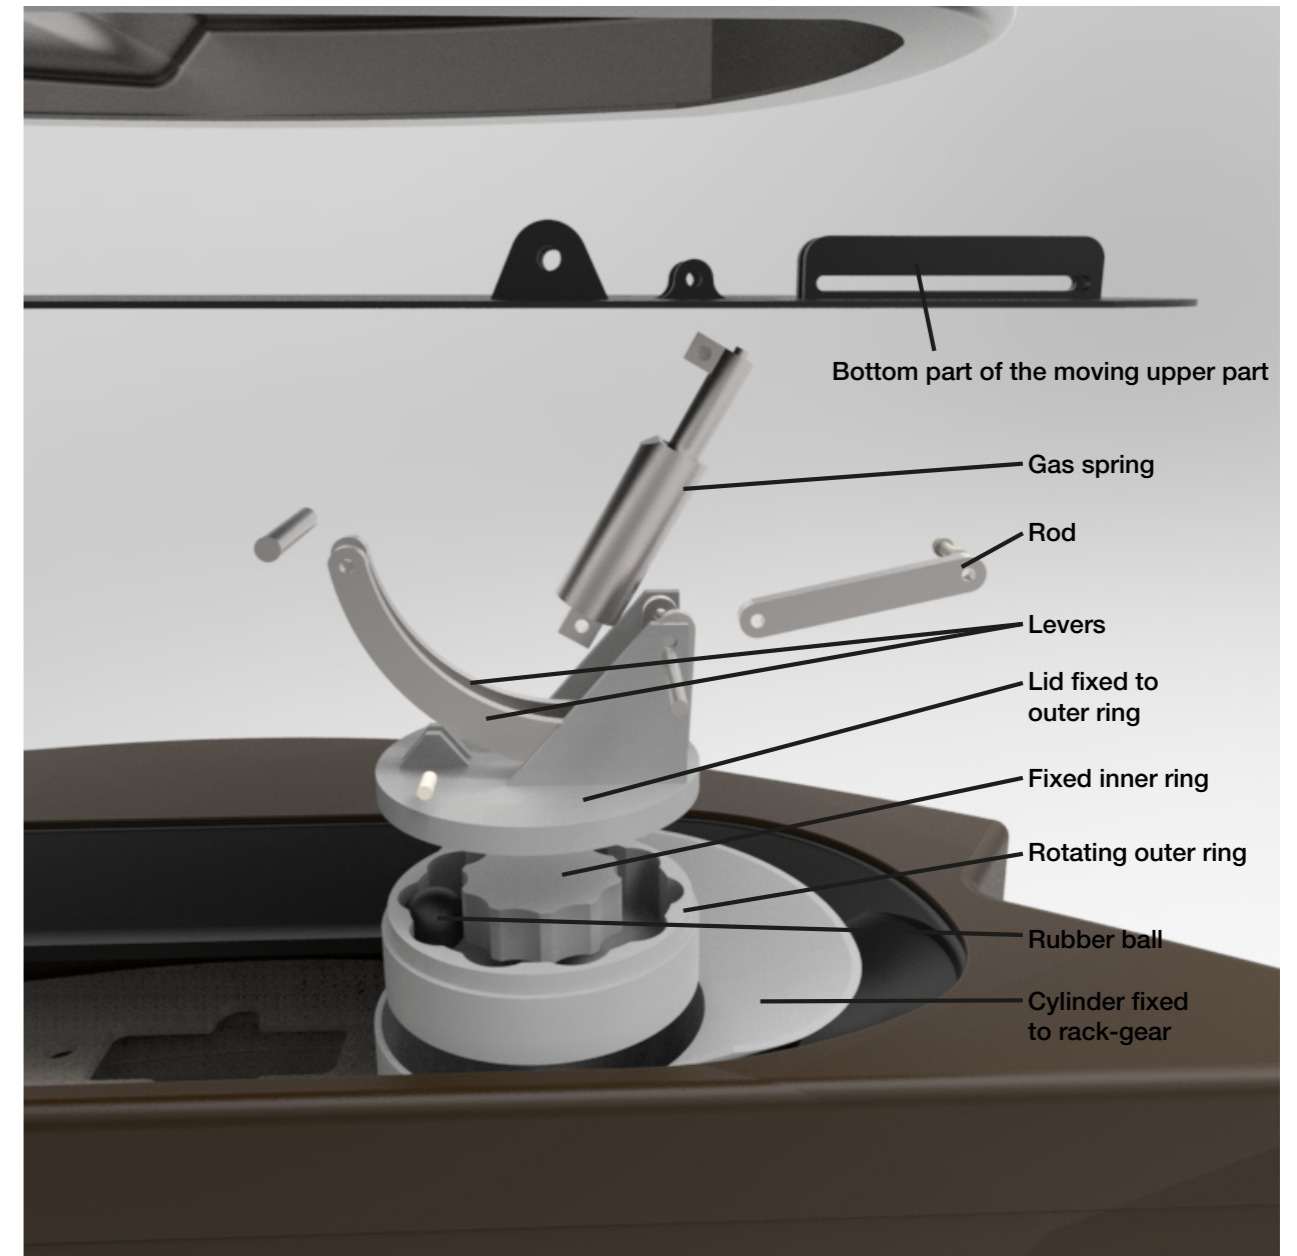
Exploded view inwards rotation mechanism and upwards rotation mechanism.
